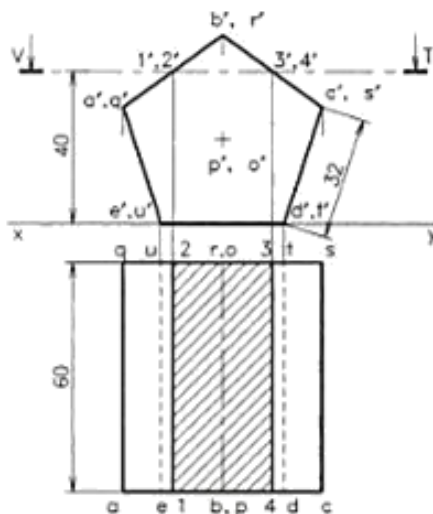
Sectional top view of a prism (section plane parallel to HP).
